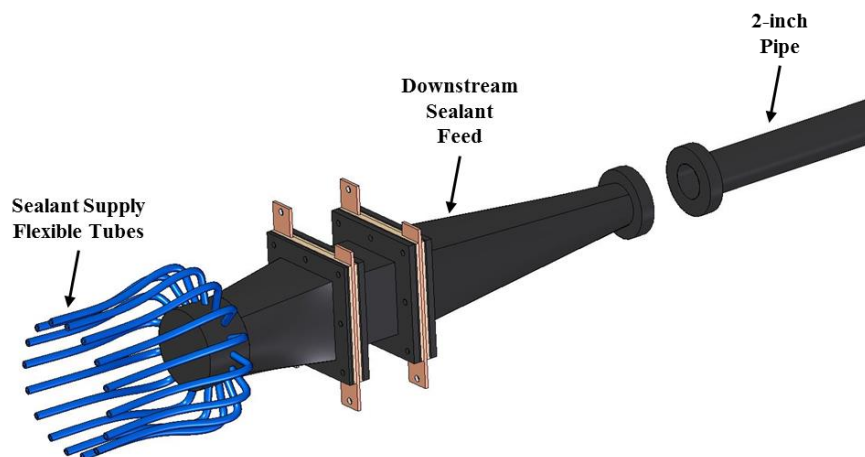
Exploded view of downstream sealing flow supply assembly
